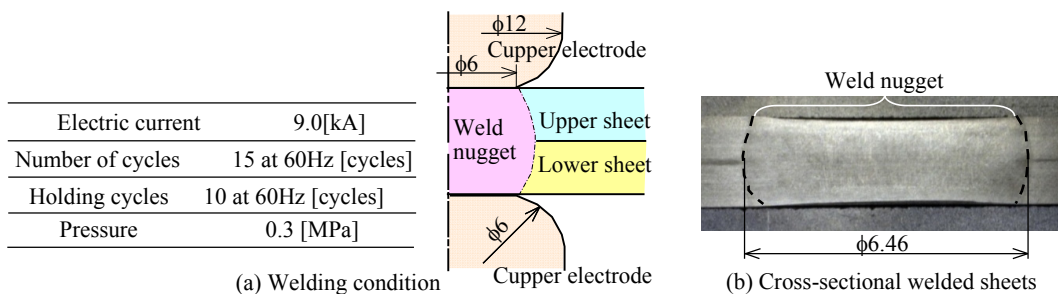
(a) Conditions of resistance spot welding and (b) cross-section of welded sheets.
